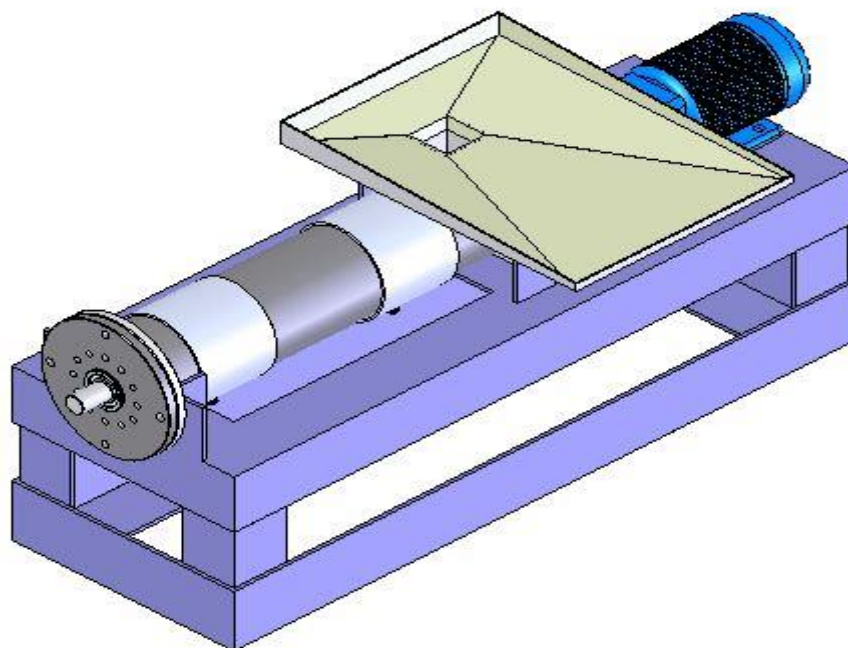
The Isometric View of the Developed Torrefaction Machine
